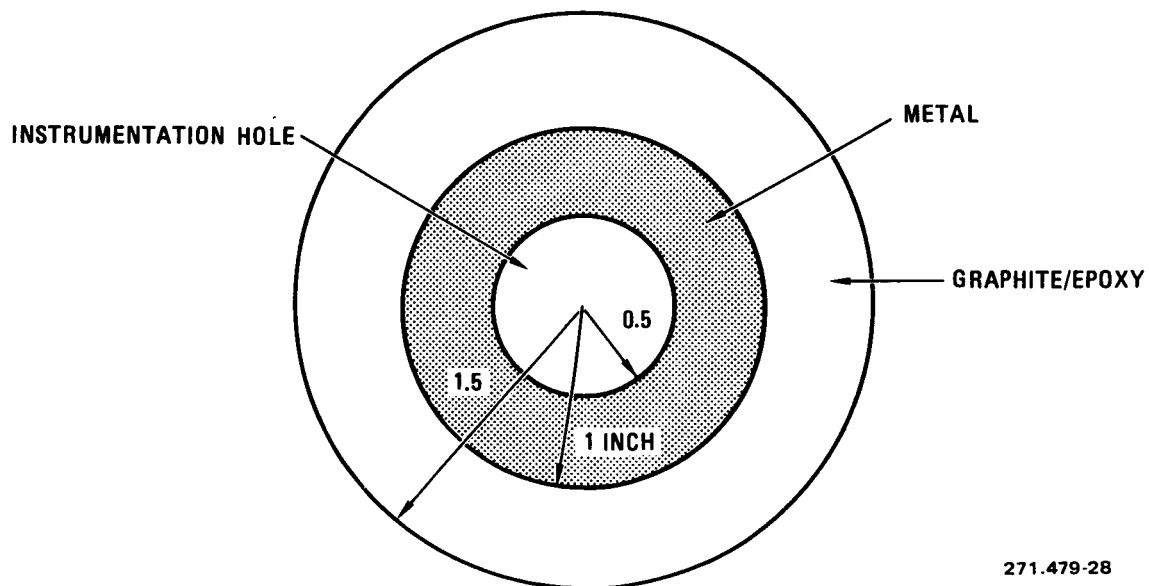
Cryogenic Wind Tunnel Advanced Sting Cross Section
